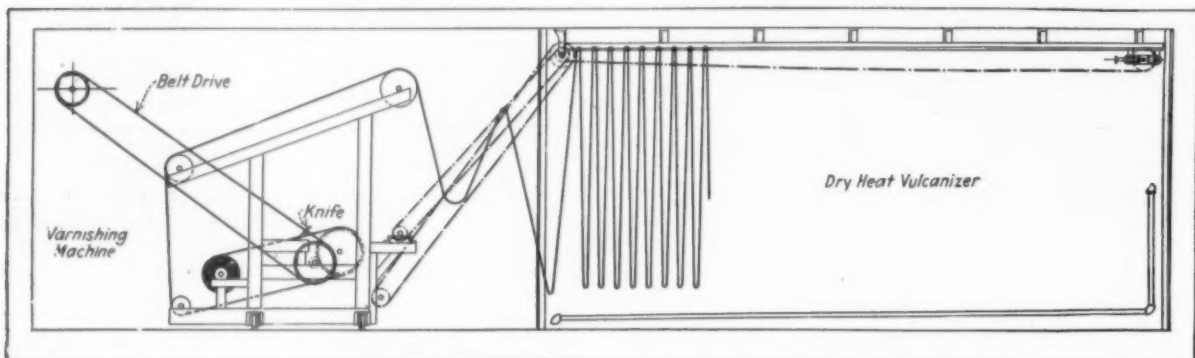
SINGLE TEXTURE FABRIC VARNISHING AND FESTOONING MACHINE AND DRY HEAT VULCANIZER.
